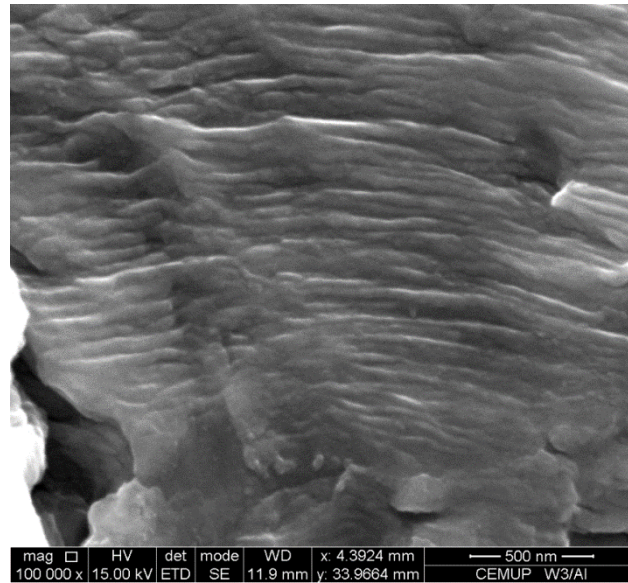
Fatigue crack striations observed with a SEM on fracture surface of a W₃ welded specimen (magnification: 100 000 x).
